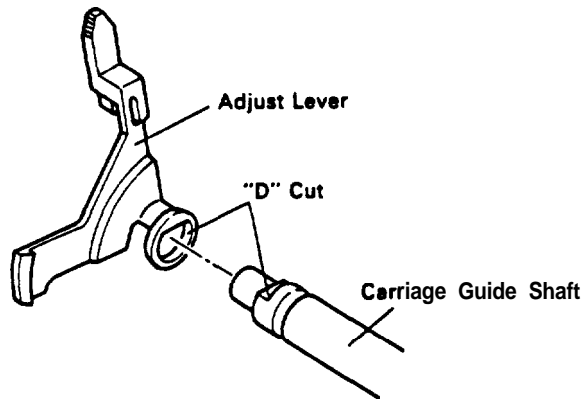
Carriage Guide Shaft and Head Adjust Lever
